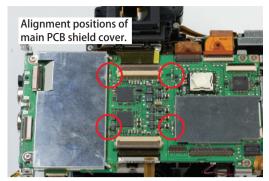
Position for the Main PCB Shield Cover (on Main PCB Ass'y)
